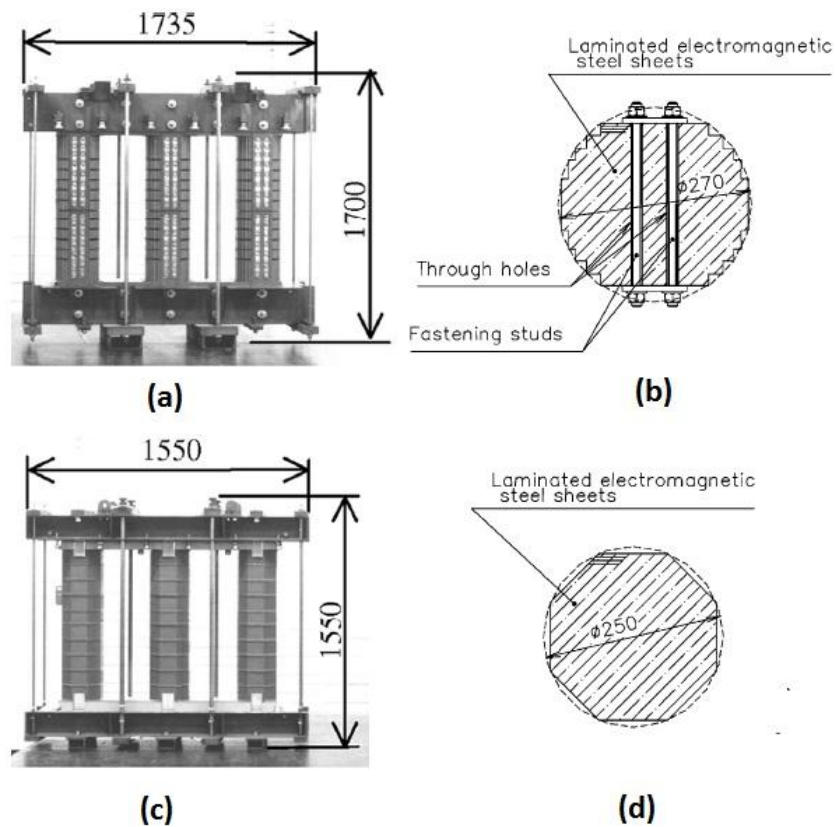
Transformer core and cross section (a) Conventional core with bolts (b) Conventional core cross section showing bolts (c) Boltless core (d) Boltless core cross section [77].
